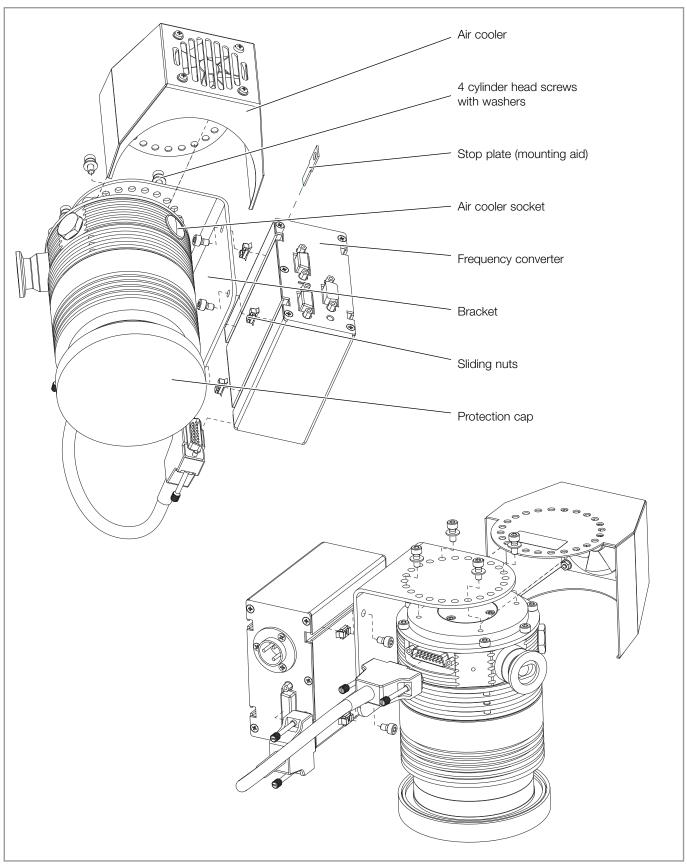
Mounting air cooling and frequency converter beside the pump
